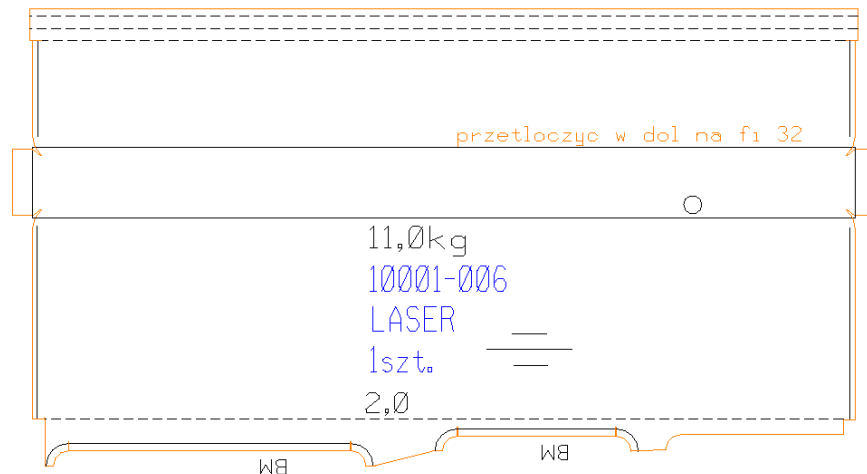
Macro-filled workpiece in a bending/.dxf drawing without dimensioning.
